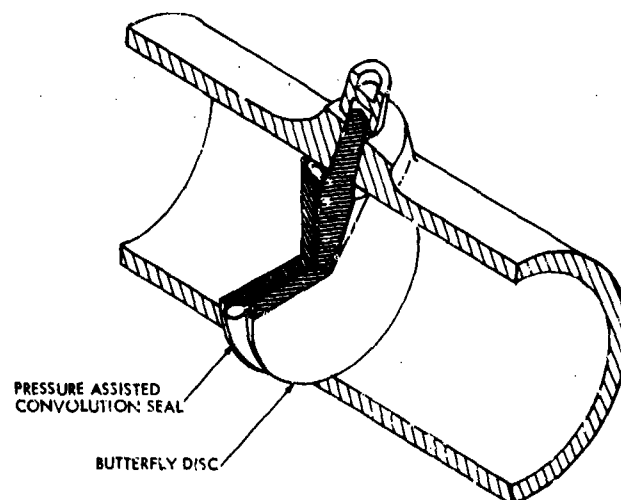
Butterfly Valve with Metal Convolution Seal on Disc
